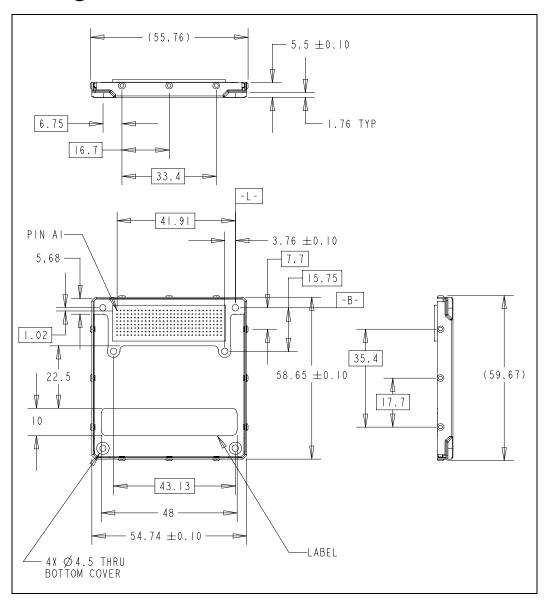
Mini-Cartridge Assembly, Bottom Cover and Sides (in mm)
